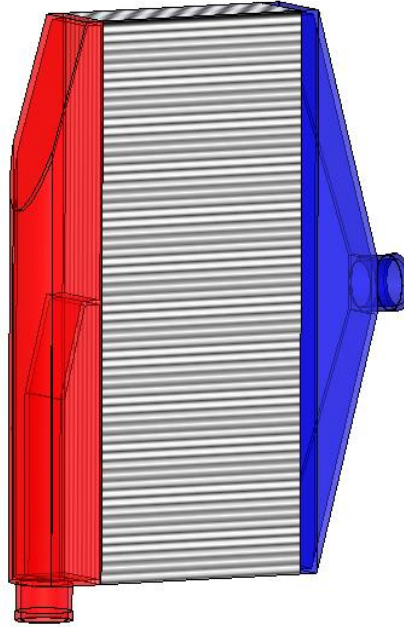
Selected core with custom end tanks. (Modeled by D. Curran)
